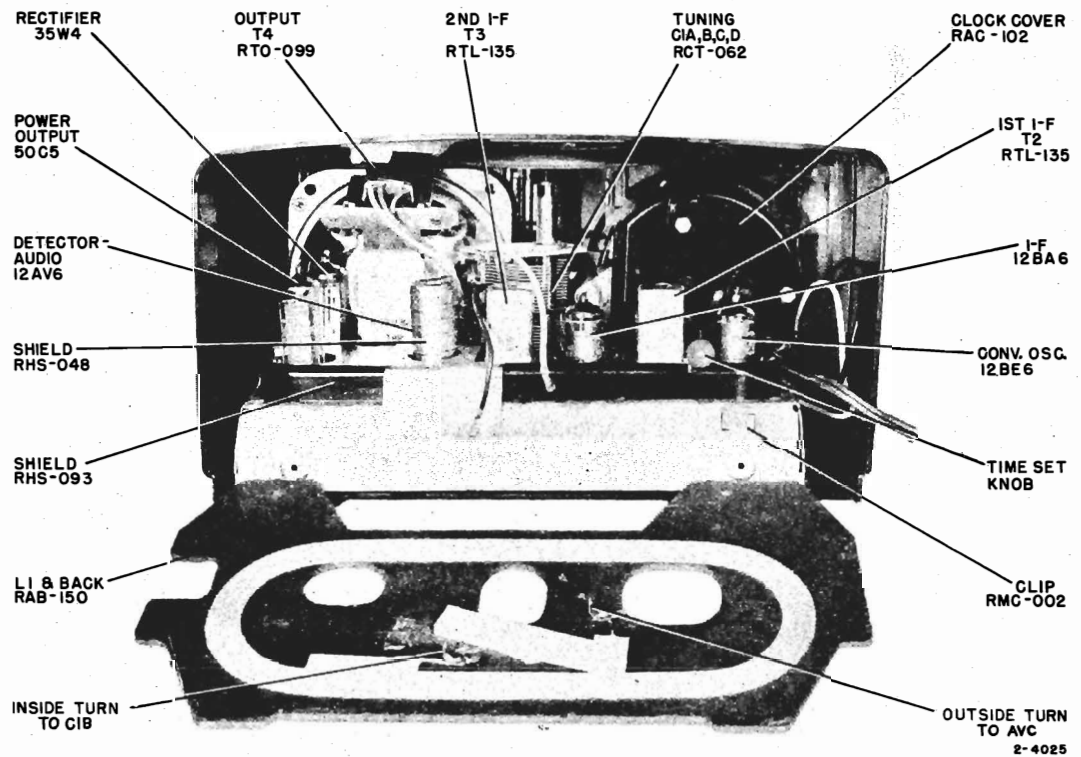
Identification of Components, Models 542 and 543, Rear view
